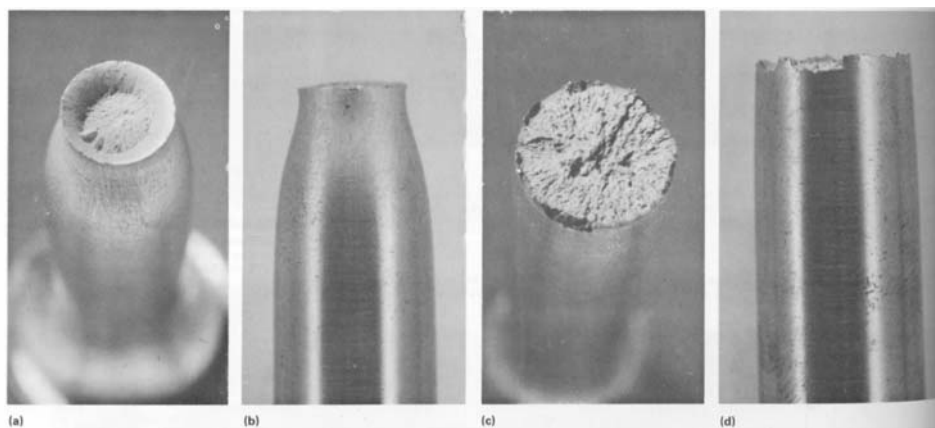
Macroscopic appearance of ductile (a) and brittle (b) tensile fractures [11].
